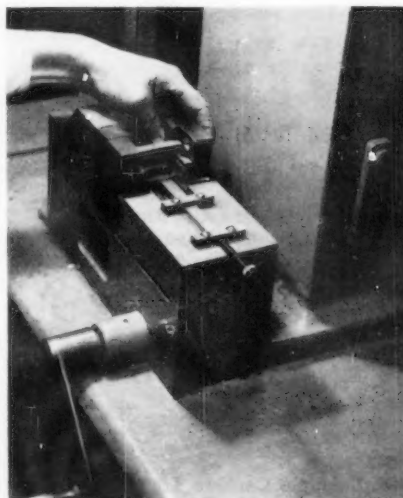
A Guide for Centering Charpy Test Specimens.
